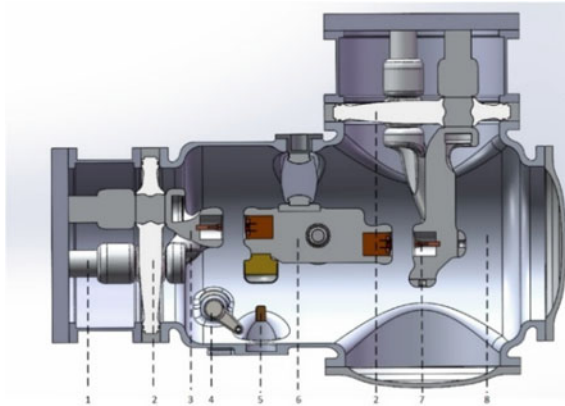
110 kV double-fracture disconnect switchgear. 1. Conductive rod, 2. Basin insulator, 3. Static side contact, 4. Linkage puller, 5. Auxiliary earth switch, 6. Double break drive mechanism, 7. Busbar static side contact, 8. Shell
